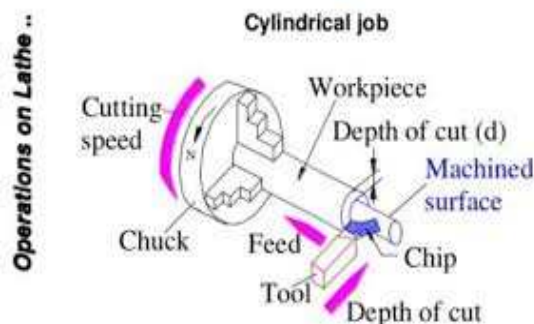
Turning of cylindrical work piece Single Point Cutting Tool Nomenclature
